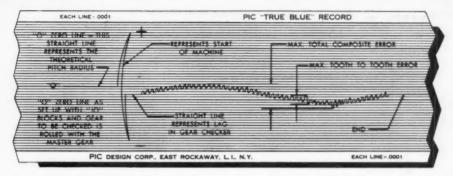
"True-Blue" tape, such as illustrated herewith, gives developed profile of gear and indicates maximum tooth-to-tooth error and maximum total-composite error.
